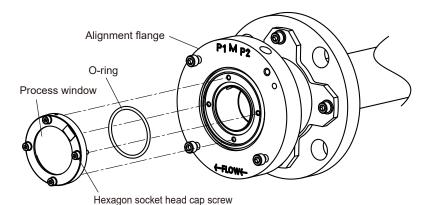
Replacing the process window and O-ring of an alignment flange
